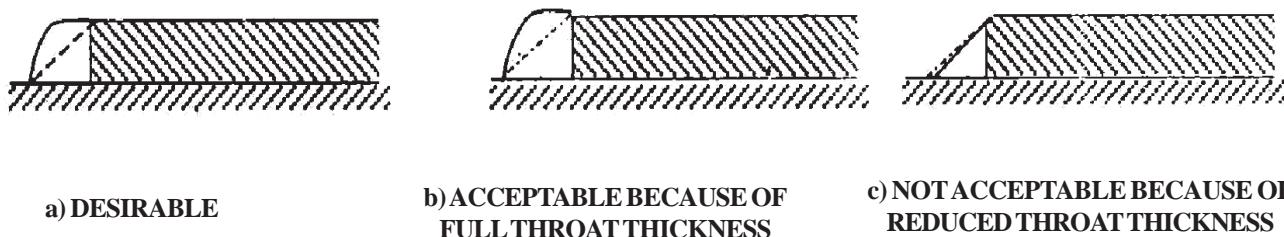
Full Size Fillet Welds Applied to the Edge of a Plate or Section
